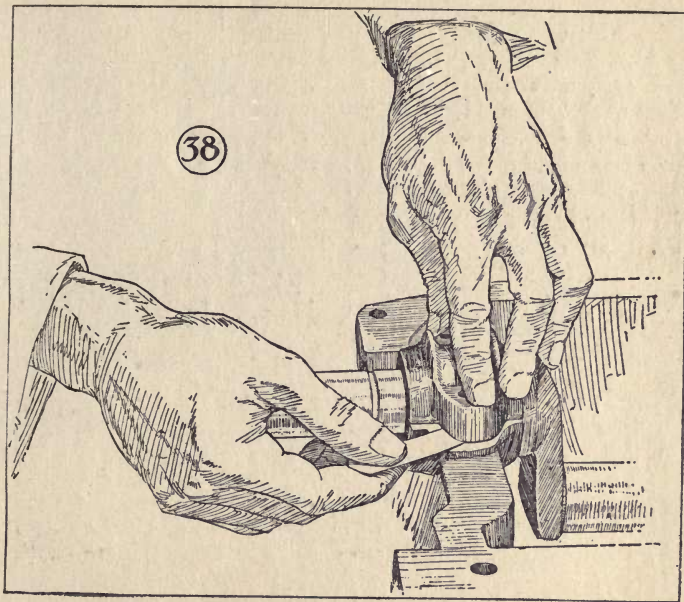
The rock of the caps should be tested with a feeler gage or piece of shim steel
